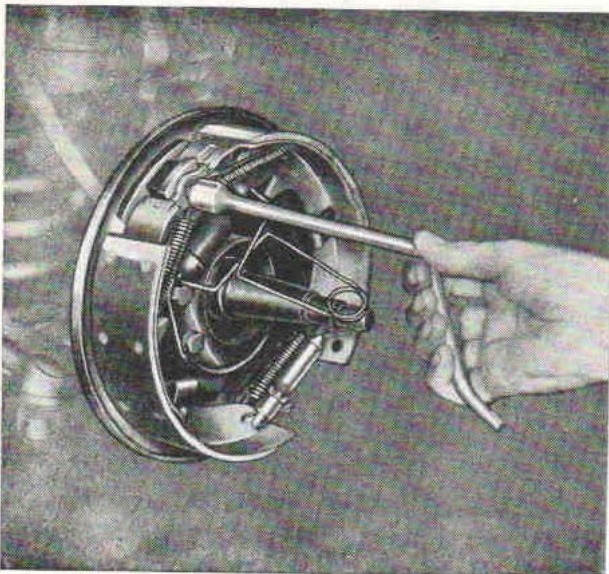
Removing the return spring with brake spring tool (Snap-on BT or corresponding).
